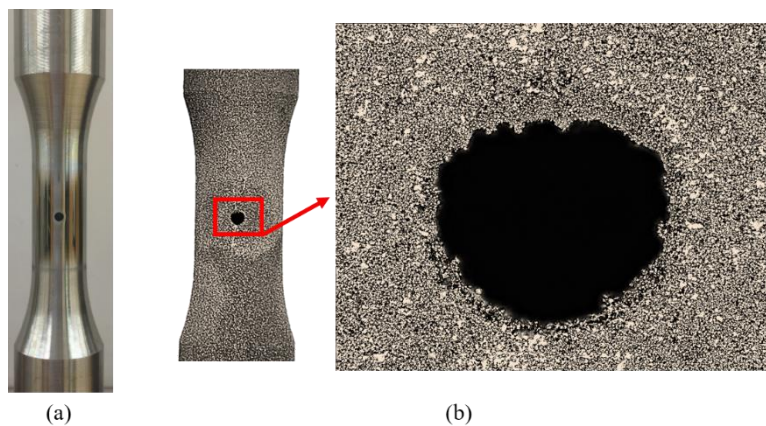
Notched tubular specimen geometries of Ti-6Al-4V specimens for (a) machined surface and (b) as-built surface conditions. The notch is built during the AM fabrication process for the as-built surface condition.
